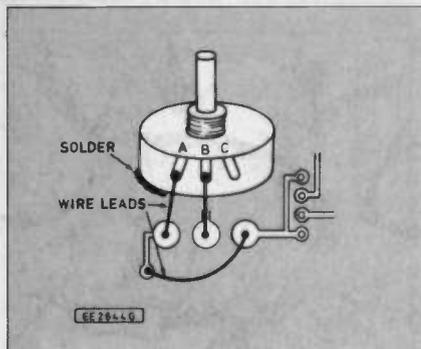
Mounting the potentiometer so as to carry the p.c.b.
